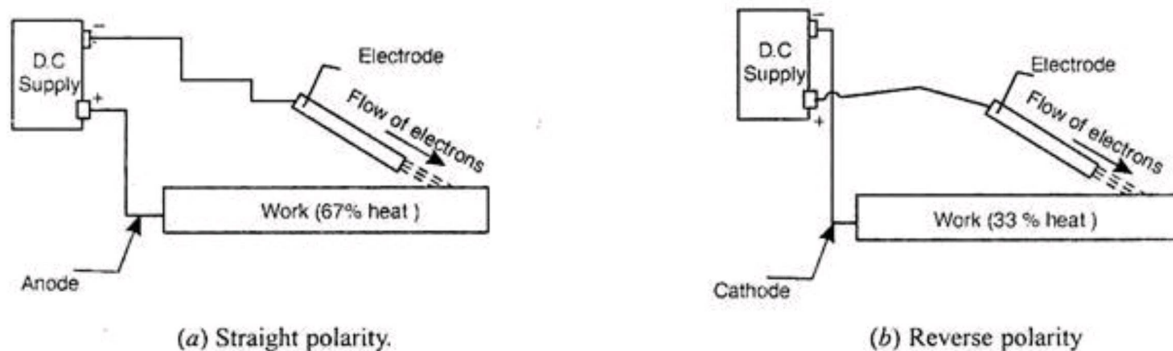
Polarity for D.C. Arc Welding.
